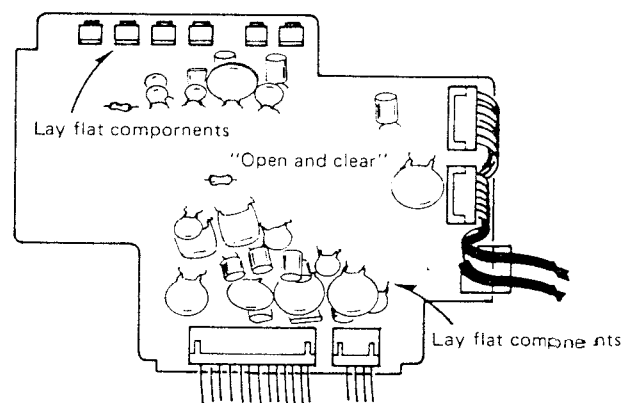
Top view of 03 P.C.B. (Head Amp)
